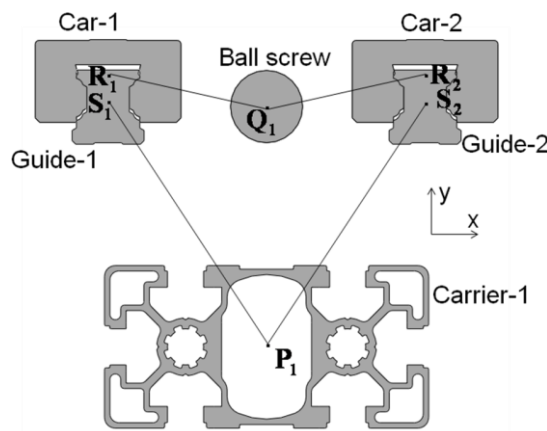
Cross section with Carrier-1, Ball screw, Car-1, Car-2, Guide-1, and Guide-2 only.
